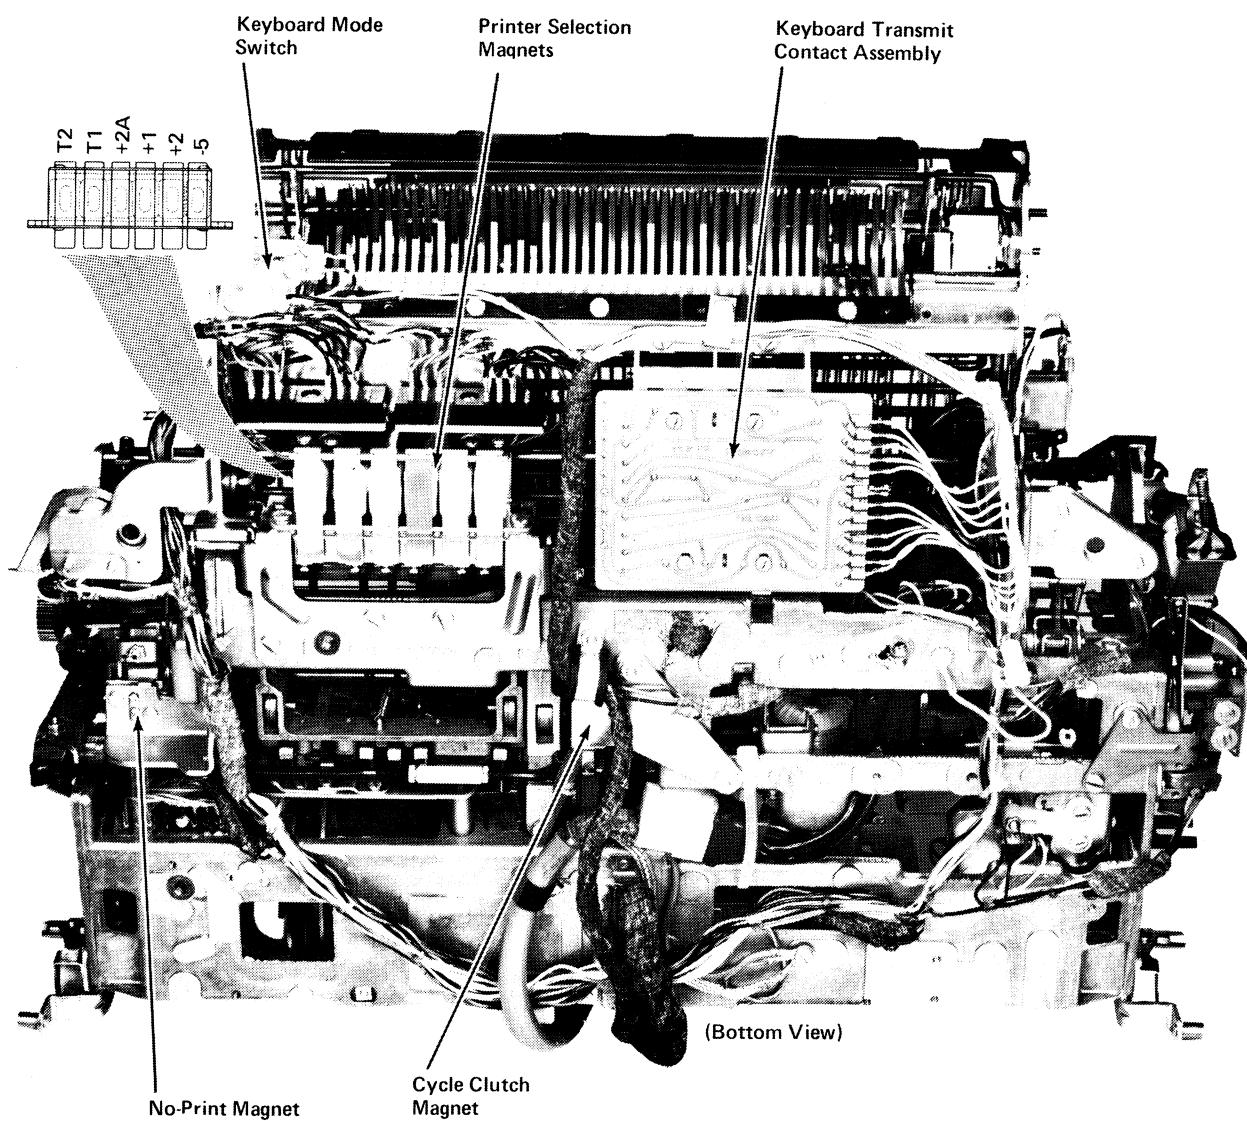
Magnet, Solenoid, and Reed Switch Locations (Bottom of Printer)
